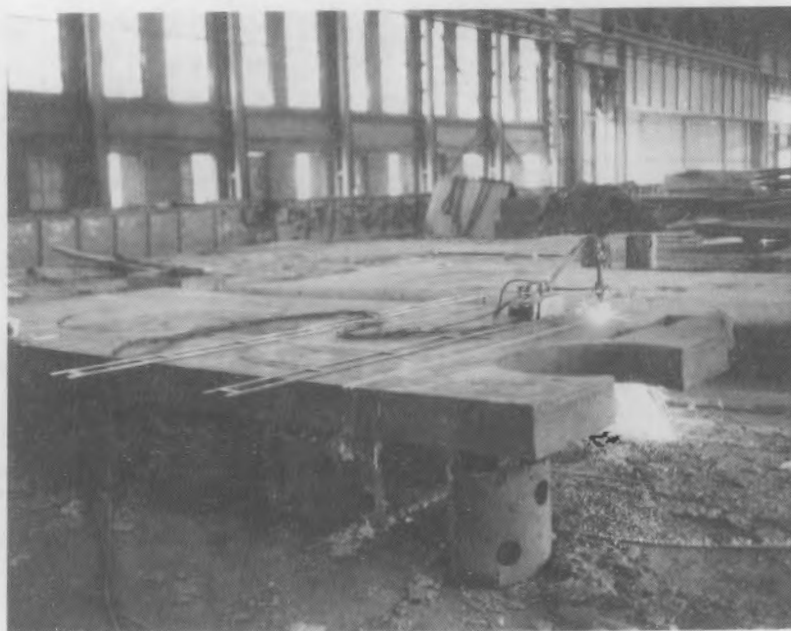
FIGURE A. Flame cutting of 8 1/4 inch A533B C1-1 plate, dropout section
